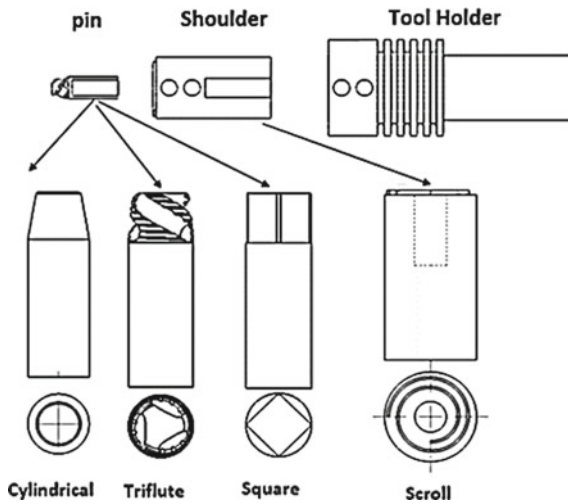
The different tool pin profile used including the scroll and tool holder [20]
